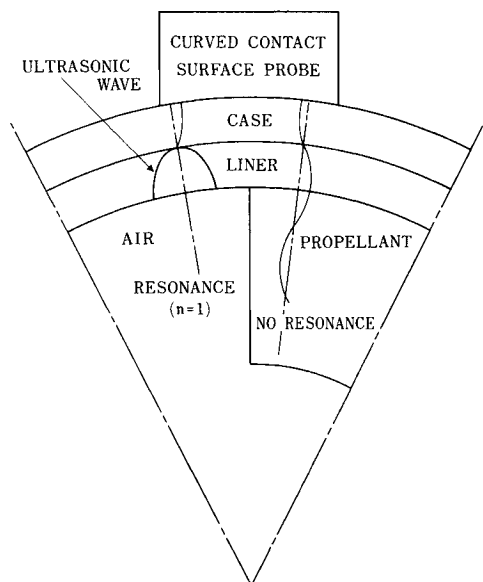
Ultrasonic inspection of motors with a curved contact surface probe.
